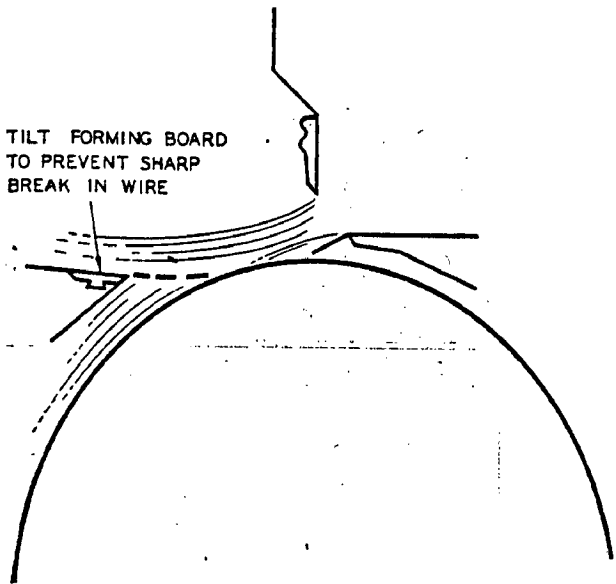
TILTING FORMING BOARD TO ACCOMMODATE WIRE
